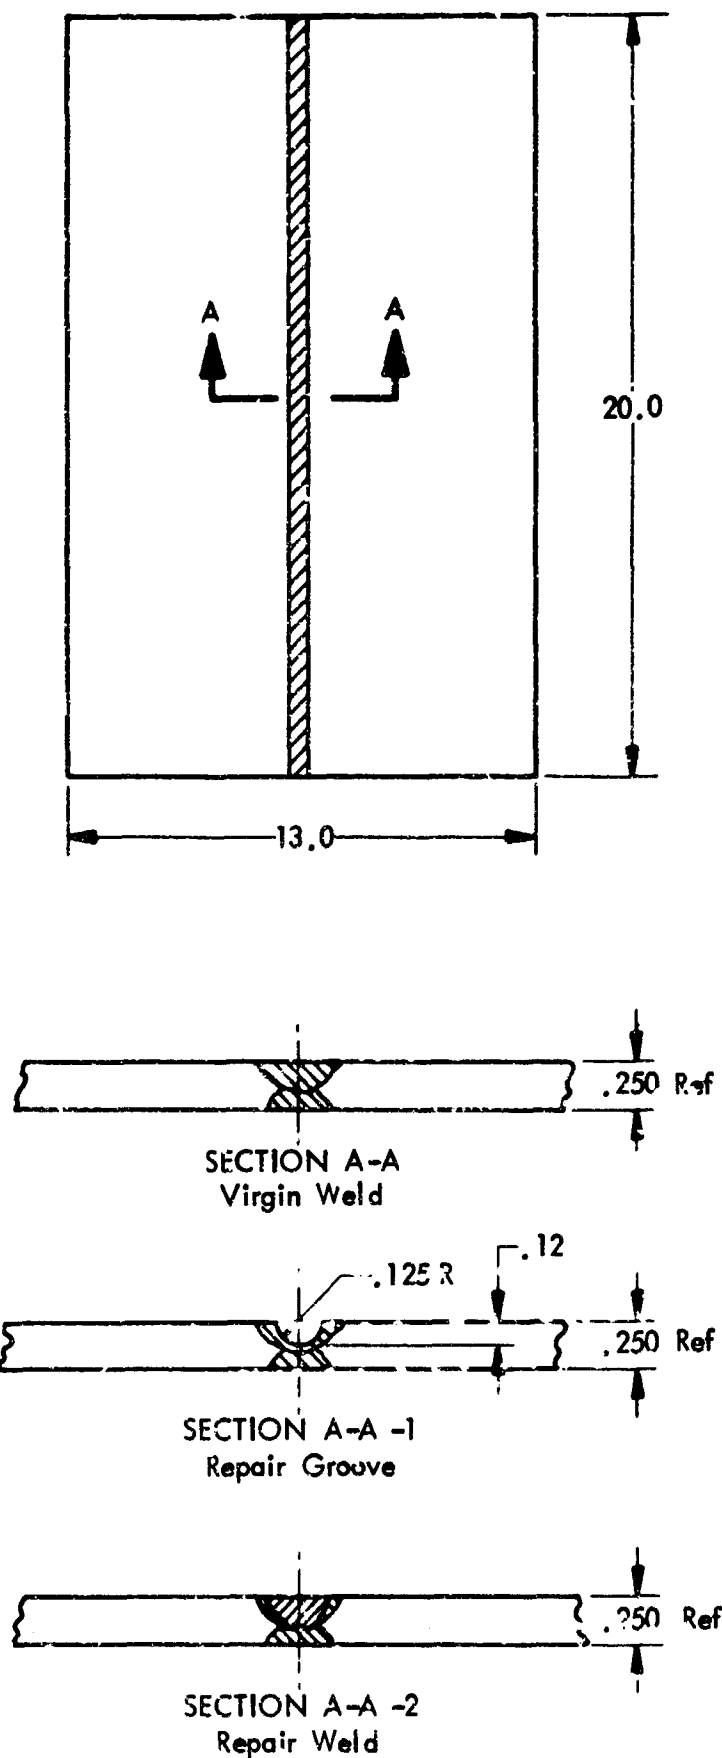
2021-T81 ALUMINUM WELD TEST PANEL
